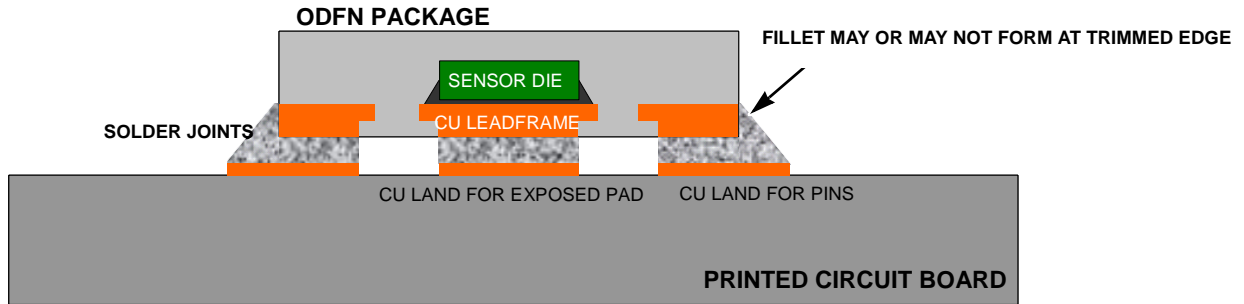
SCHEMATIC SHOWING ODFN PACKAGE MOUNTED ON PCB
